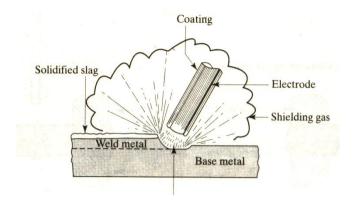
Schematic illustration of the shielded metal arc welding process.
